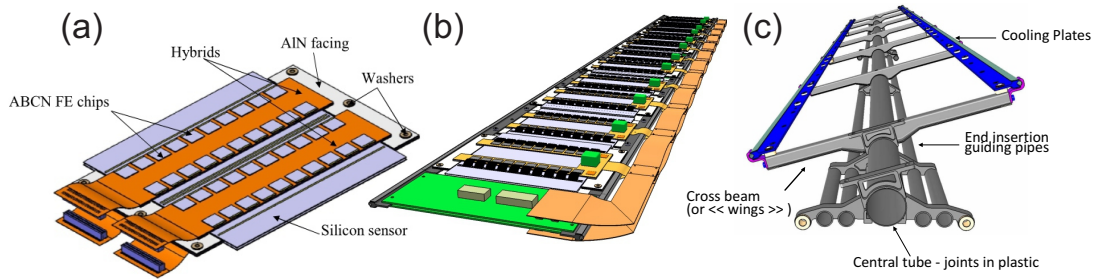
a) Schematic of the double sided short strip modules using the ABC250 FE chip b) Supermodule frame supporting double-sided modules. c) Supermodule support allowing end insertion.
